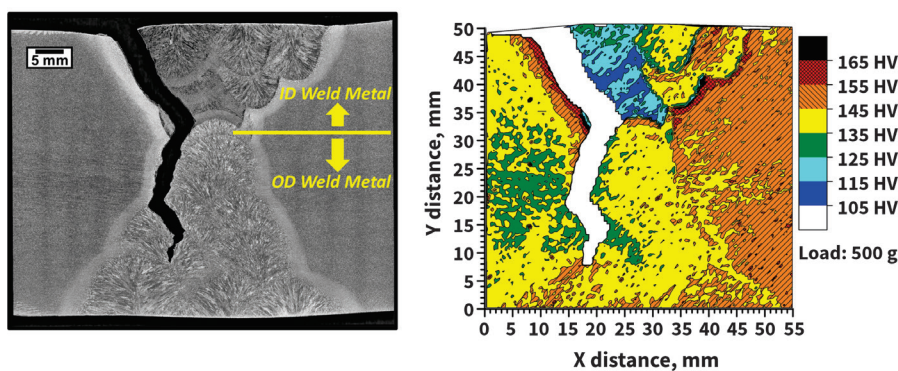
Cross section of a long-seam weld in a high energy pipe, showing a crack near the weld (left) and a hardness distribution map of this weld showing region of lower hardness near the ID.
